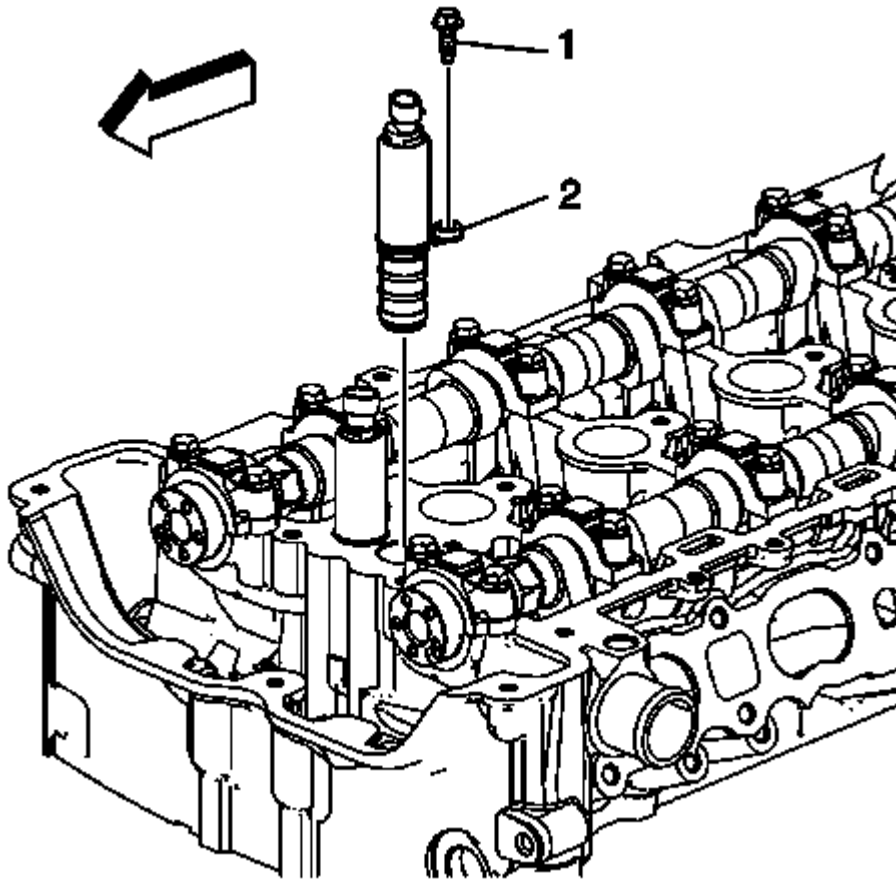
Intake Camshaft Position Actuator Solenoid Valve & Bolt
